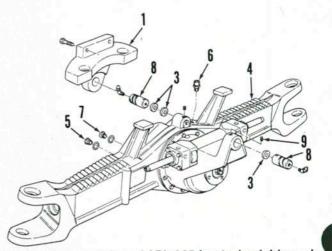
Exploded view of APL-365 front wheel drive axle housing and pivot support typical of late production TW-25 and TW-35 tractors. Except for retaining set screw (9), refer to Fig. 5 for legend.
